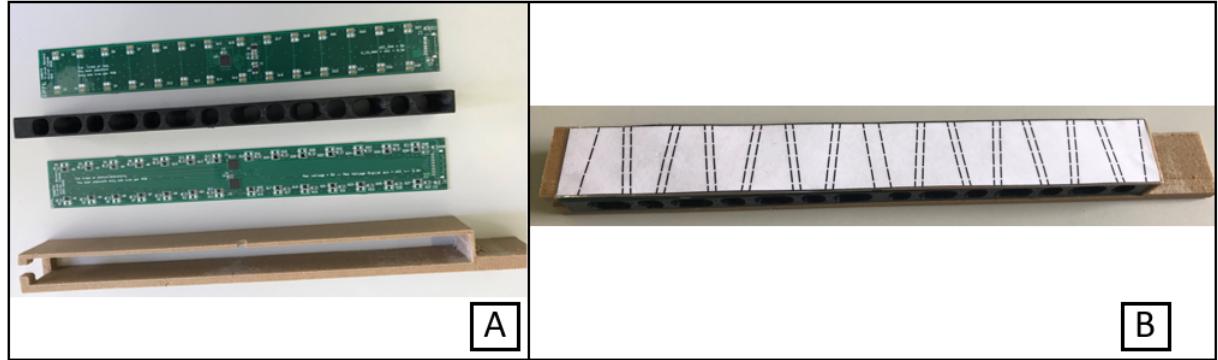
(A): From top to bottom: Emitters' PCB, Channels' structure, Receivers' PCB and Protective box (B): Module assembled
